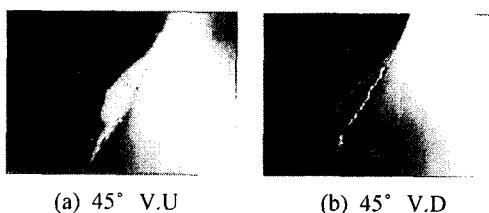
Flank wear form according to tool path at cutting speed in 300m/min
